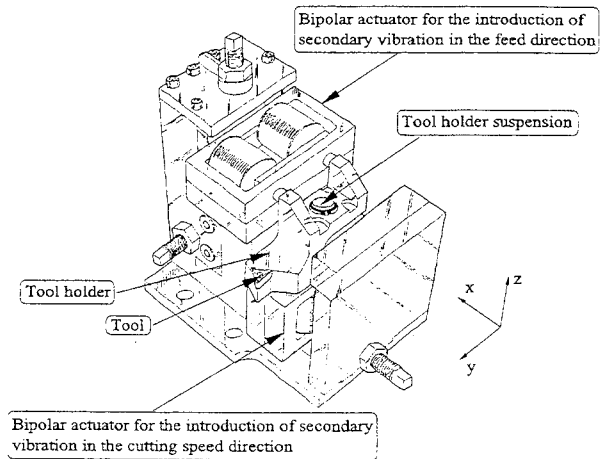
Tool holder with integrated actuators for the control of tool vibration in the metal cutting process [9].
